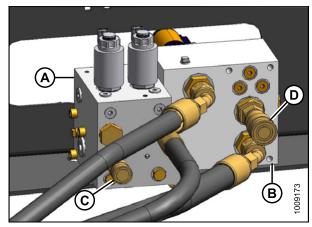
Valve Blocks without Reverser Valve Configured for Auger Header
